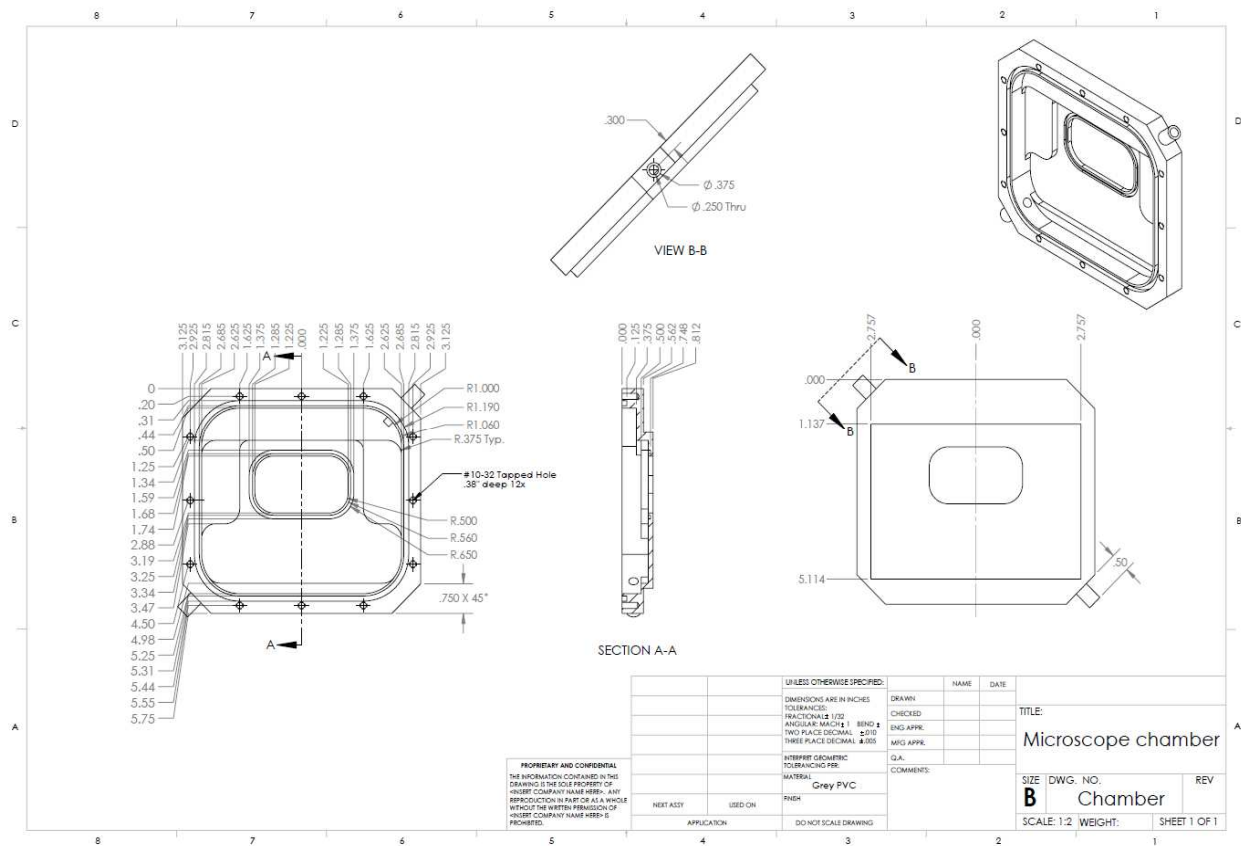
Microscope chamber technical drawing outlining dimensions.
